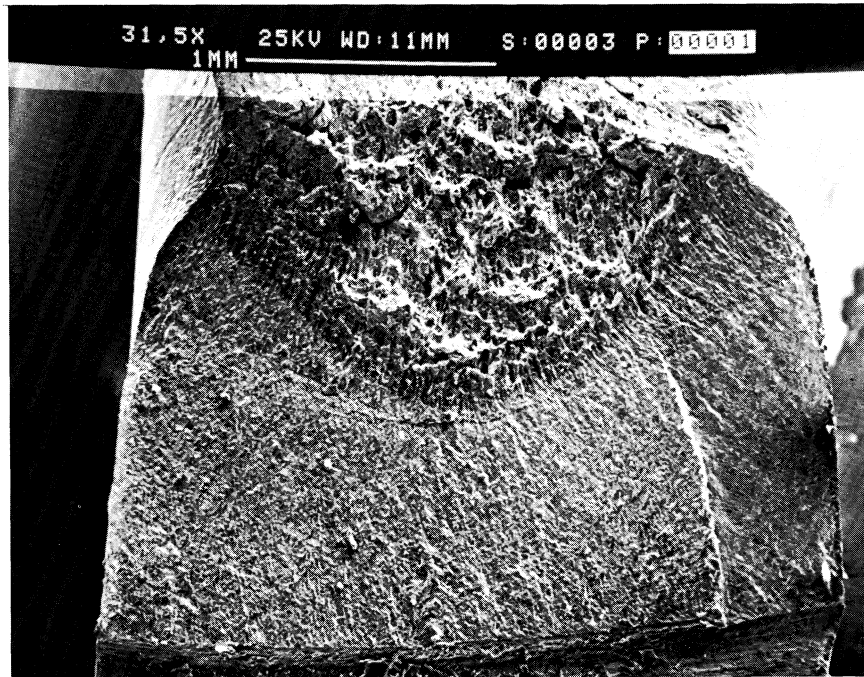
Fatigue fracture surface. Test 2. Arrow shows direction of crack growth.
